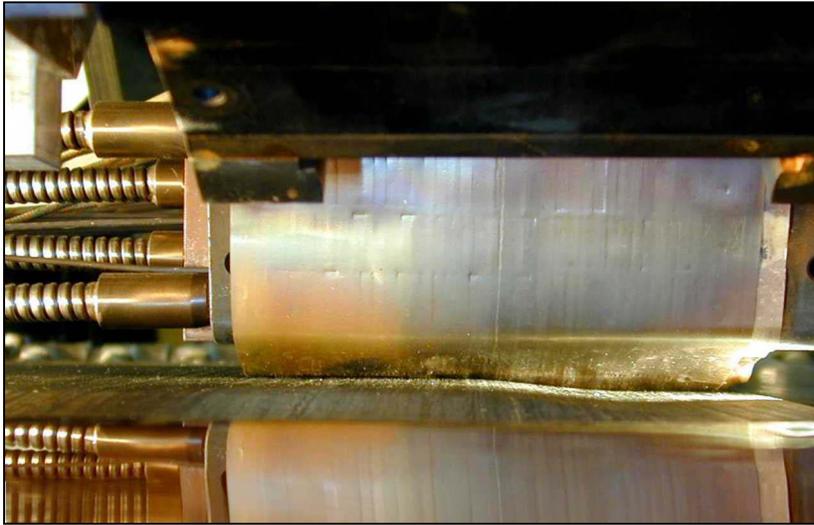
Tool surface of [0/-45/90/45]_{2s} pad-up laminate produced on pyramid shaped tool
